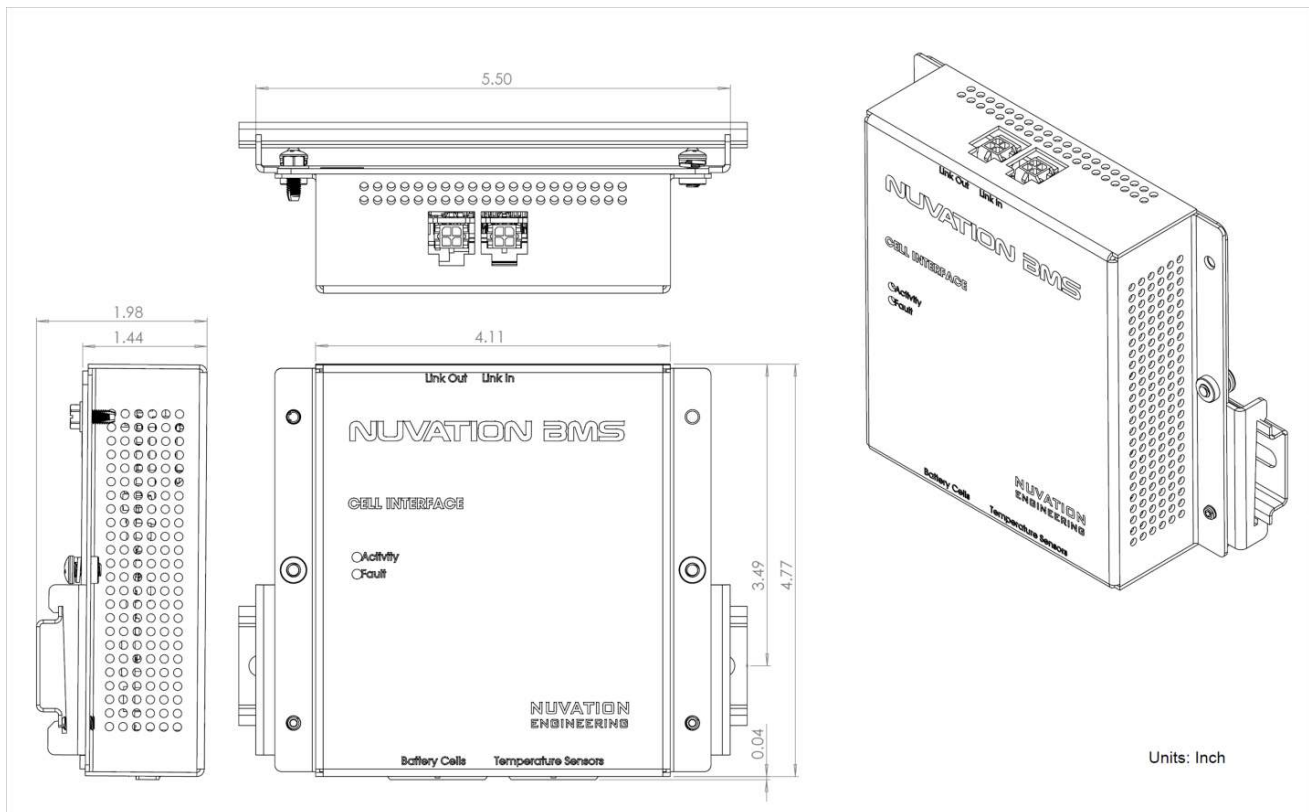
Mechanical Drawing of Cell Interface with Cell Interface Mounting Bracket (Bulkhead-to-DIN)
